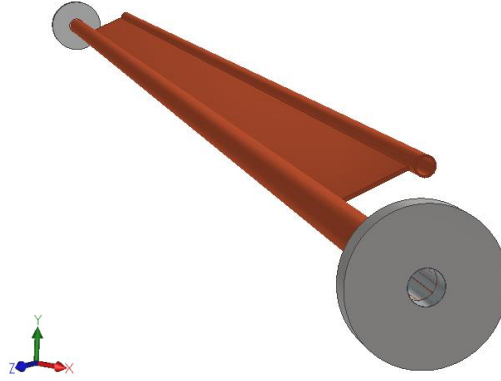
Electroformed vacuum chamber dimensions for Athos. Concept drawing.
